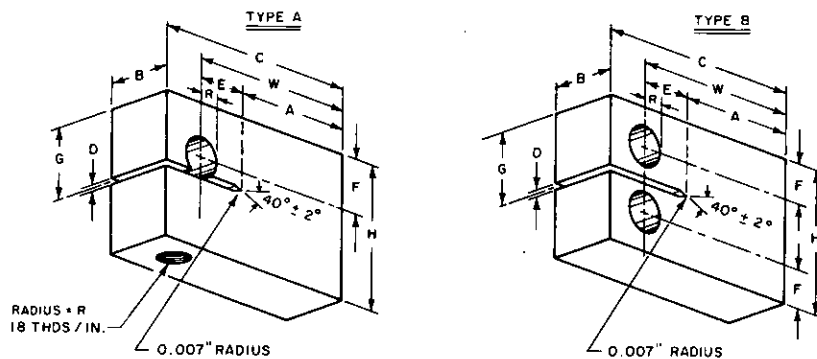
Fatigue-cracked cantilever-beam test specimen.
